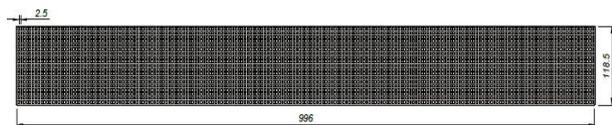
The Copper Wire Mesh Dimensions (Unit in mm).
